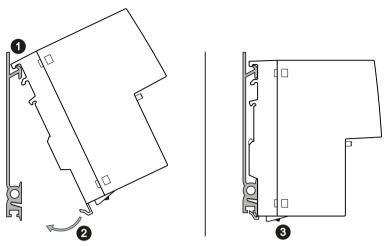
S7-1500 mounting rail installation with the securing bar in the wall mounting position.
